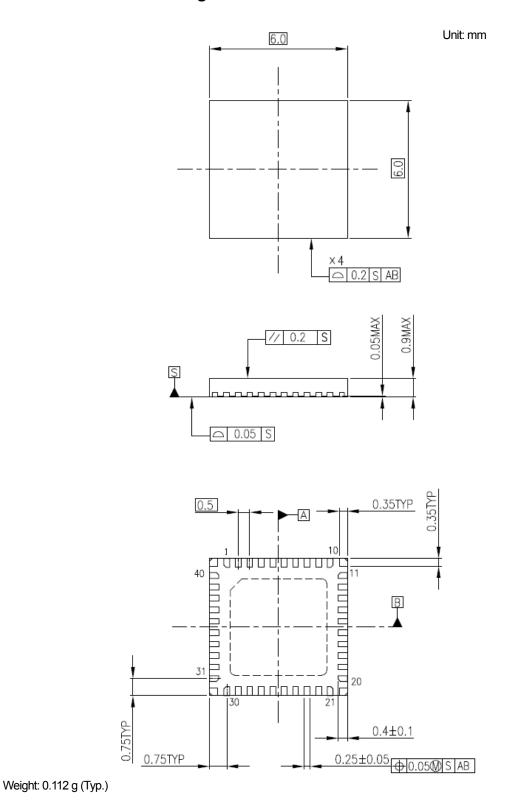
Package outline (P-VQFN40-0606-0.50-001)
